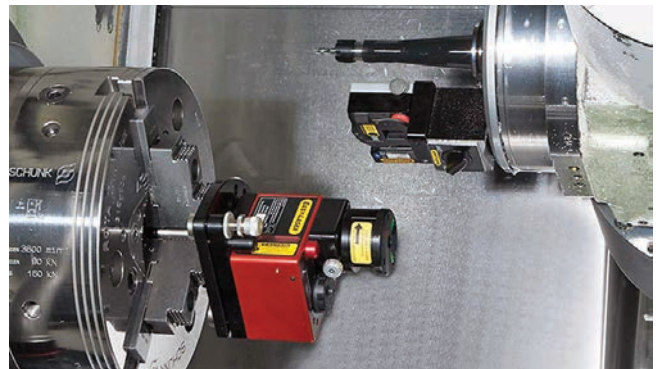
EASY-LASER E940 Machine Tool measuring system [30]
